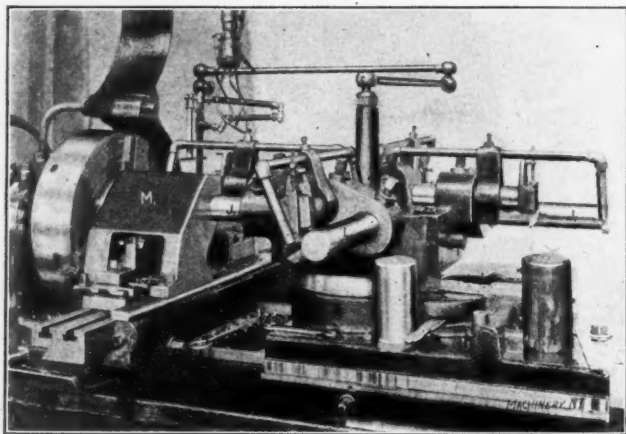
Turning and Facing the Outside of the Bowl with Supported Tool-holders of Special Construction
